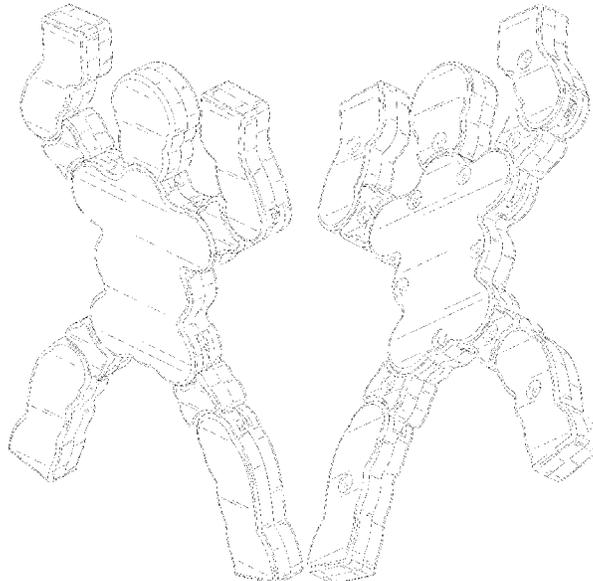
is rear, bottom and left side a perspective view of a disassembled state of the front half and the rear half.
